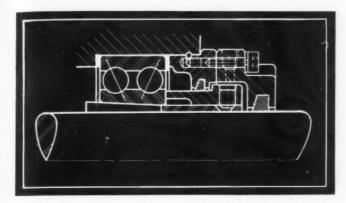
A tapered adapter sleeve allowing a tight fit between the bore and the sleeve secures this double row angular contact bearing to the shaft
